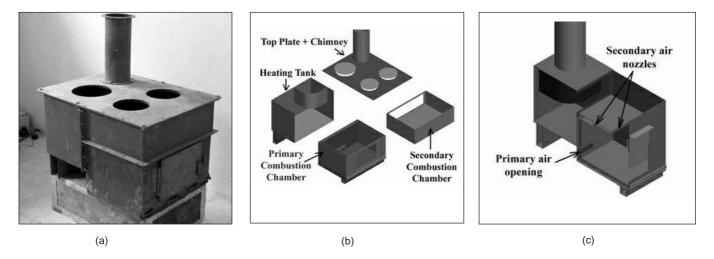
(a) Improved stove; (b) improved stove schematic; (c) secondary combustion chamber detail
